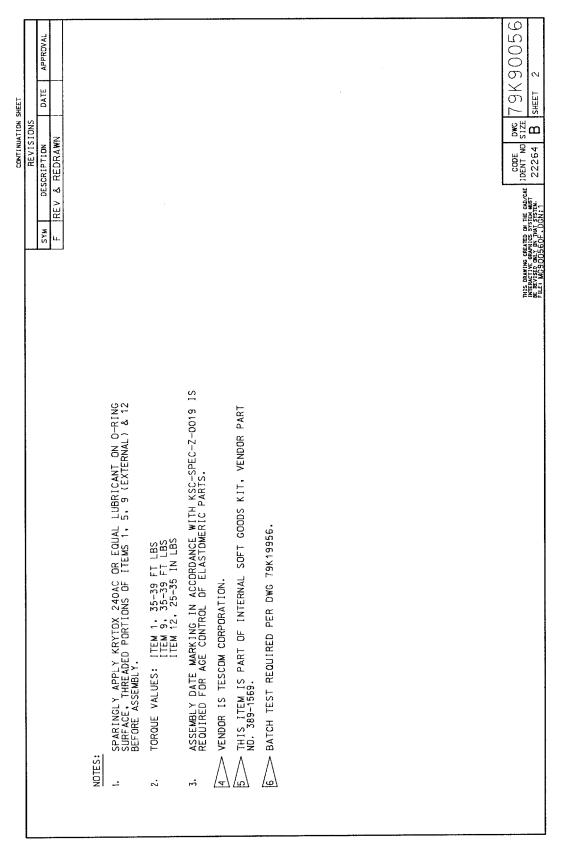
Typical Component Maintenance Drawing (Sheet 2 of 5)
